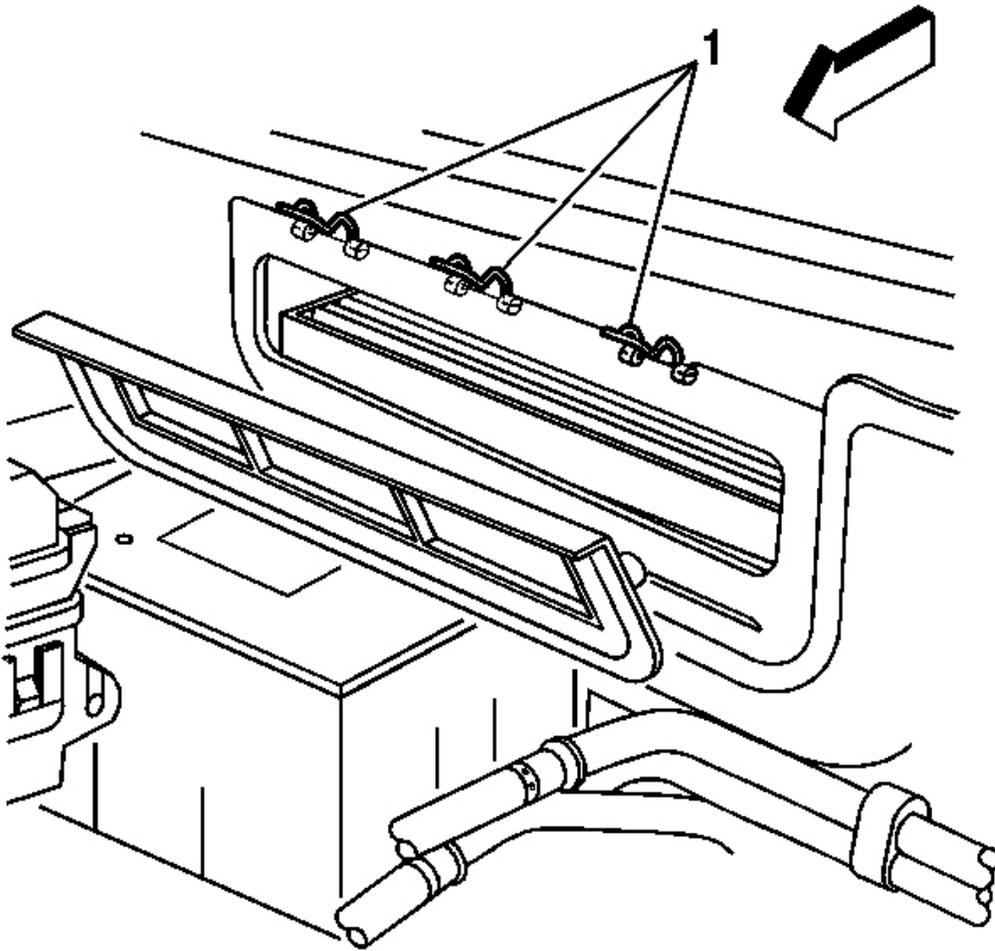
Passenger Compartment Air Filter Housing Cover & Retainer Clips
